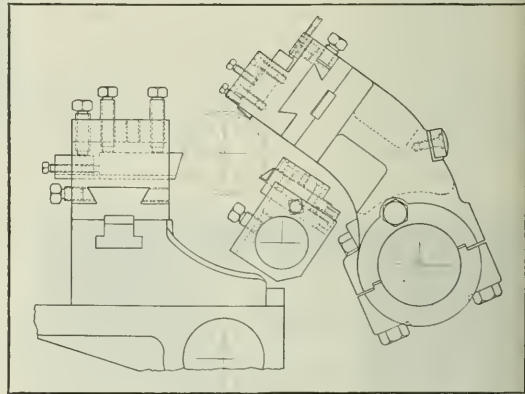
Illustration showing the Intermediate Holder of the Tooling in Fig. 16
